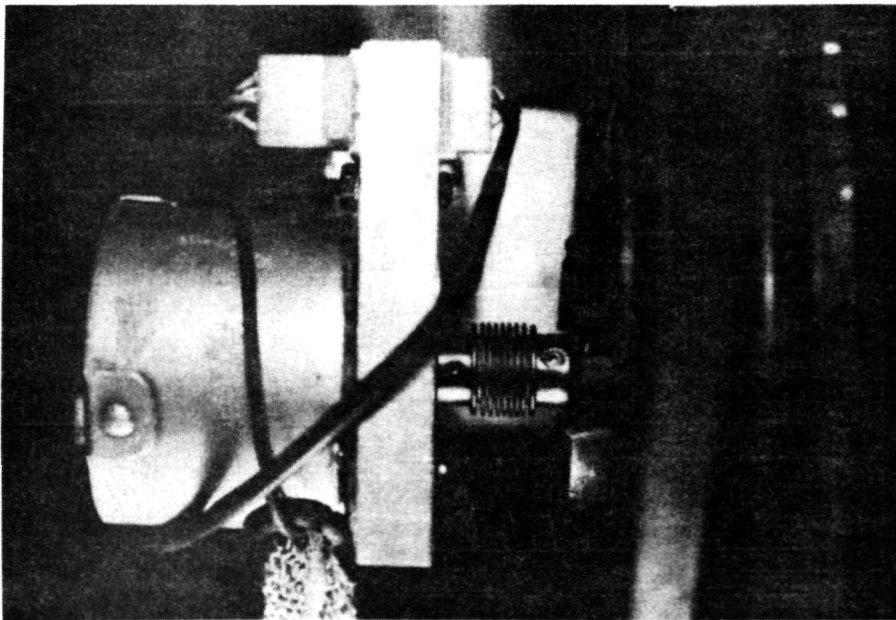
SHAFT ENCODER ASSEMBLY
